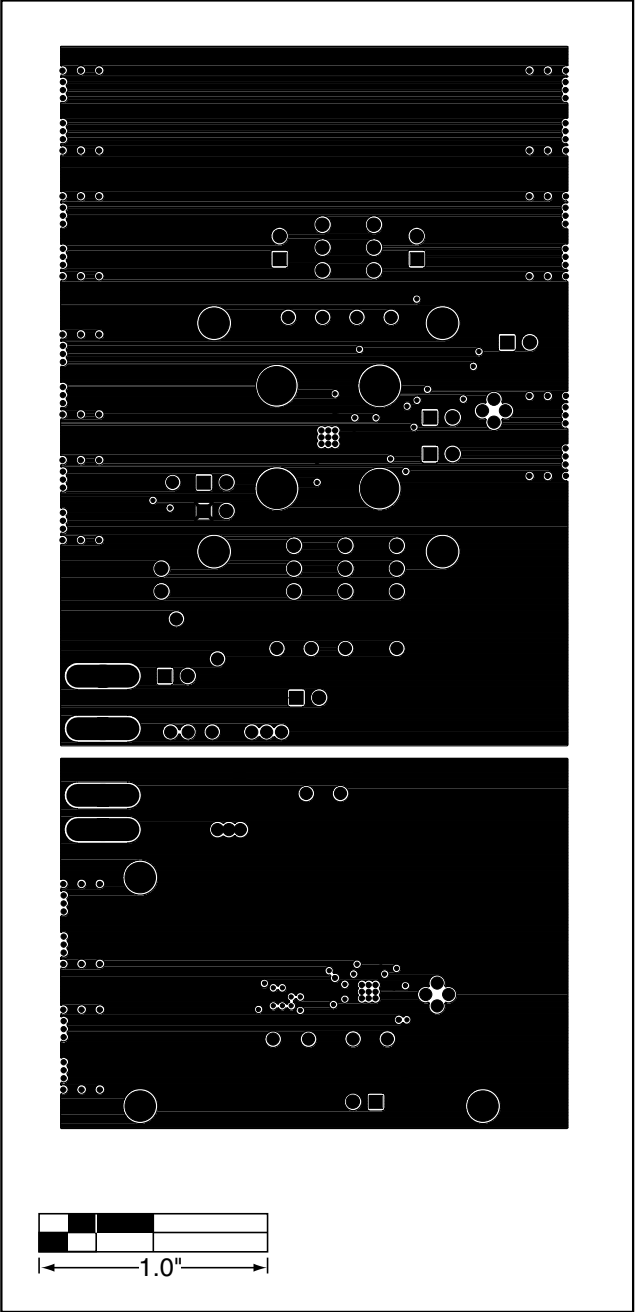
MAX3740 EV Kit PC Board Layout—Power Plane
